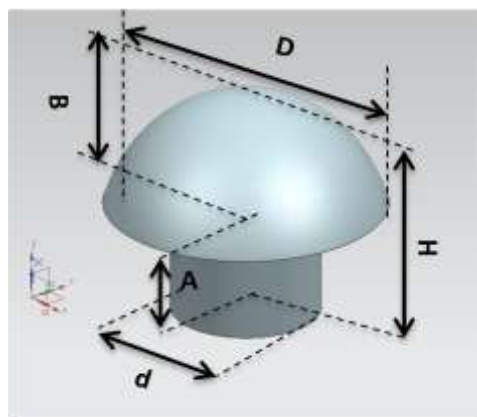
Dimensions to be measured for the mushroom-shaped part
